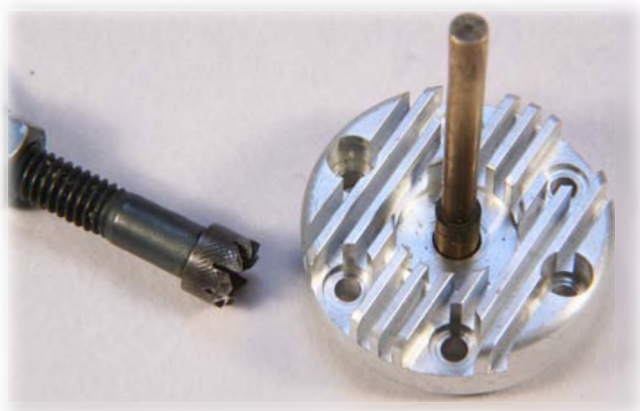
My spot facer is a hardened cap head bolt with the teeth cut in.
